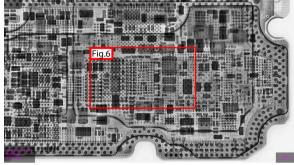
Fluoroscopic Image of the Double-stacked Printed Circuit Board
